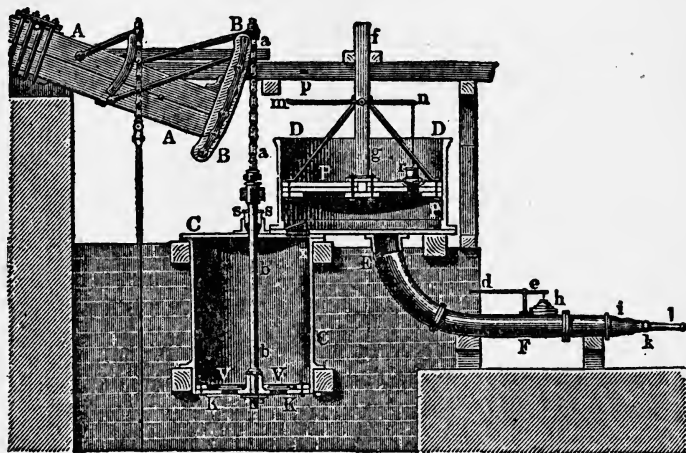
DEVELOPED CYLINDRICAL BLOWING ENGINE
